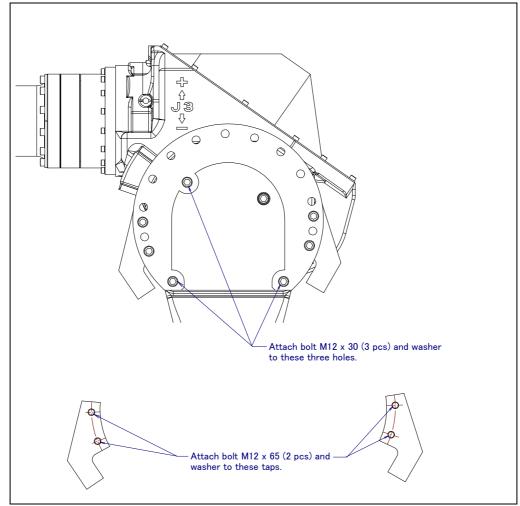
(c) J3-Axis movable mechanical stopper
